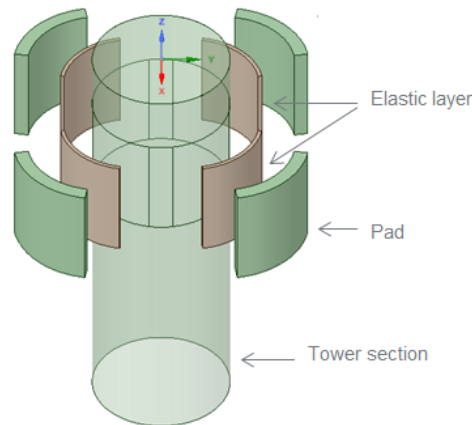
Spaceclaim geometry exploded view with 4 pads
